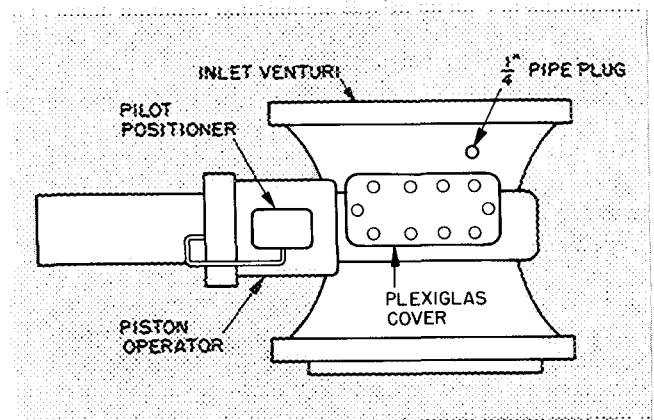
Pneumatic Vane Shaft Seal Chamber
